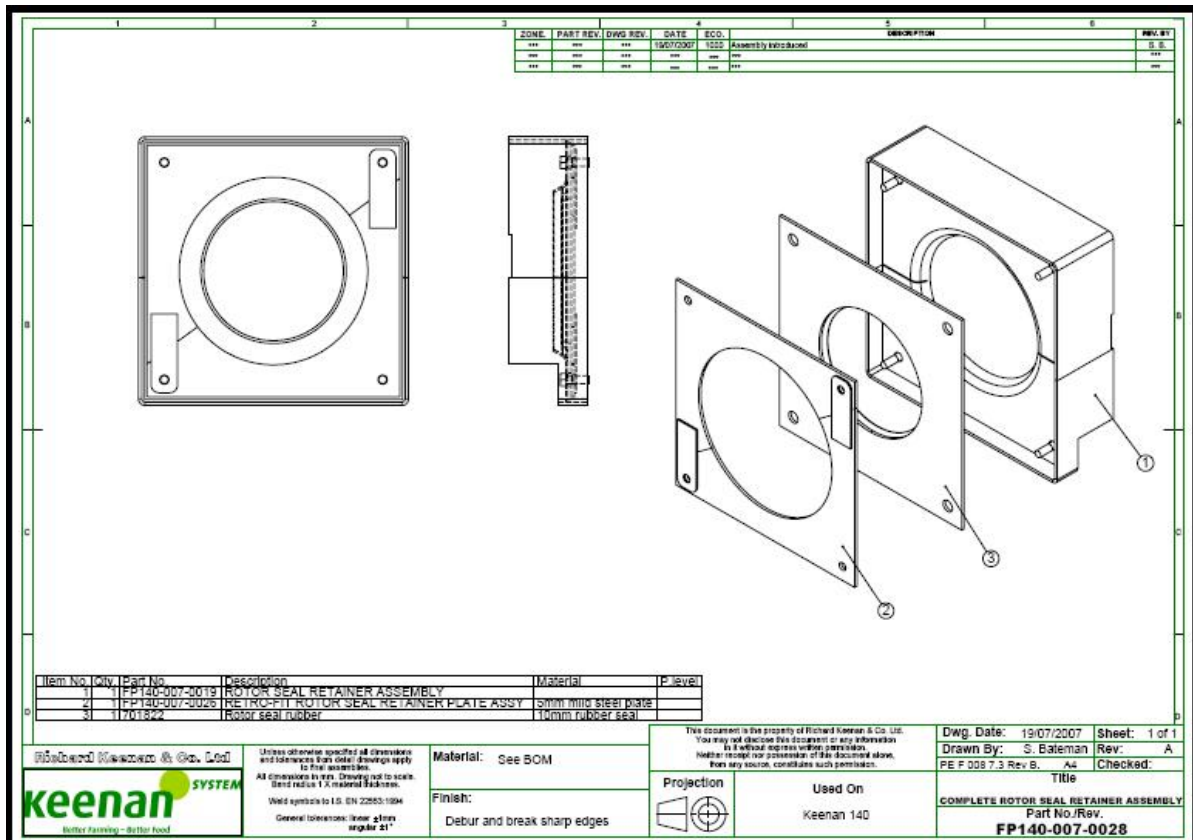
showing exploded view of complete assembly FP140-007-0028
